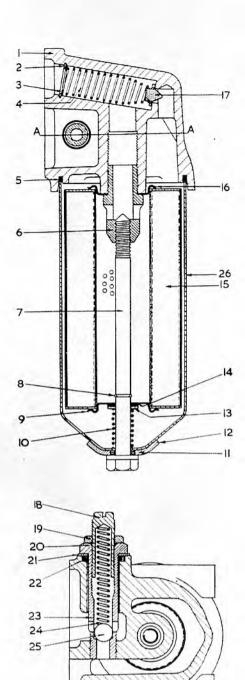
SECTIONAL VIEW OF LUBRICATING OIL FILTER
